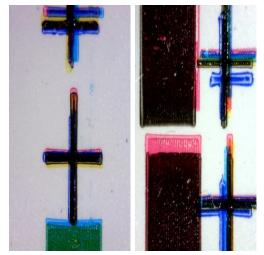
Product 2: The left side cross-shaped fitting markers and the right side.
